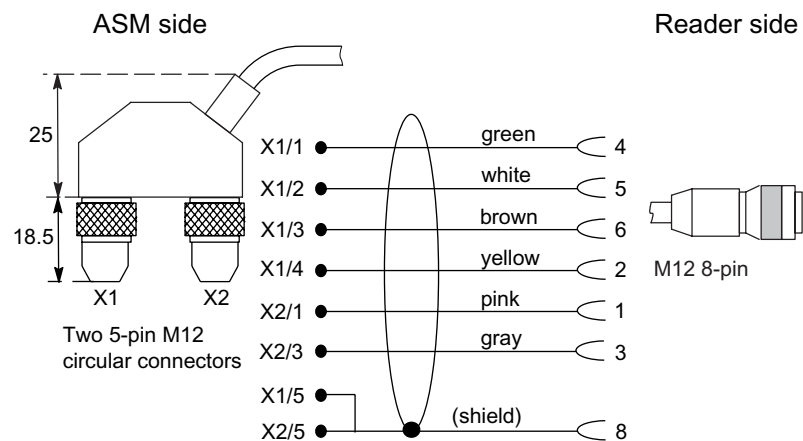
Connecting cable (2 m) ASM 452/473 ↔ RF3xxR reader with RS422 (6GT2891-1CH20)
